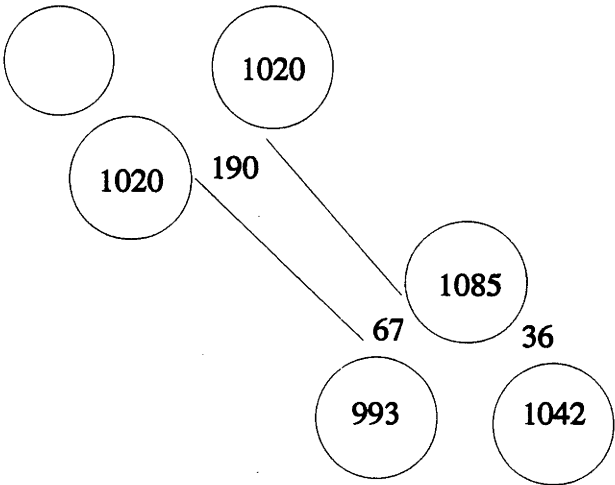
A3 Mill Settings and Roller Diameters - 1993 Crushing Season.
